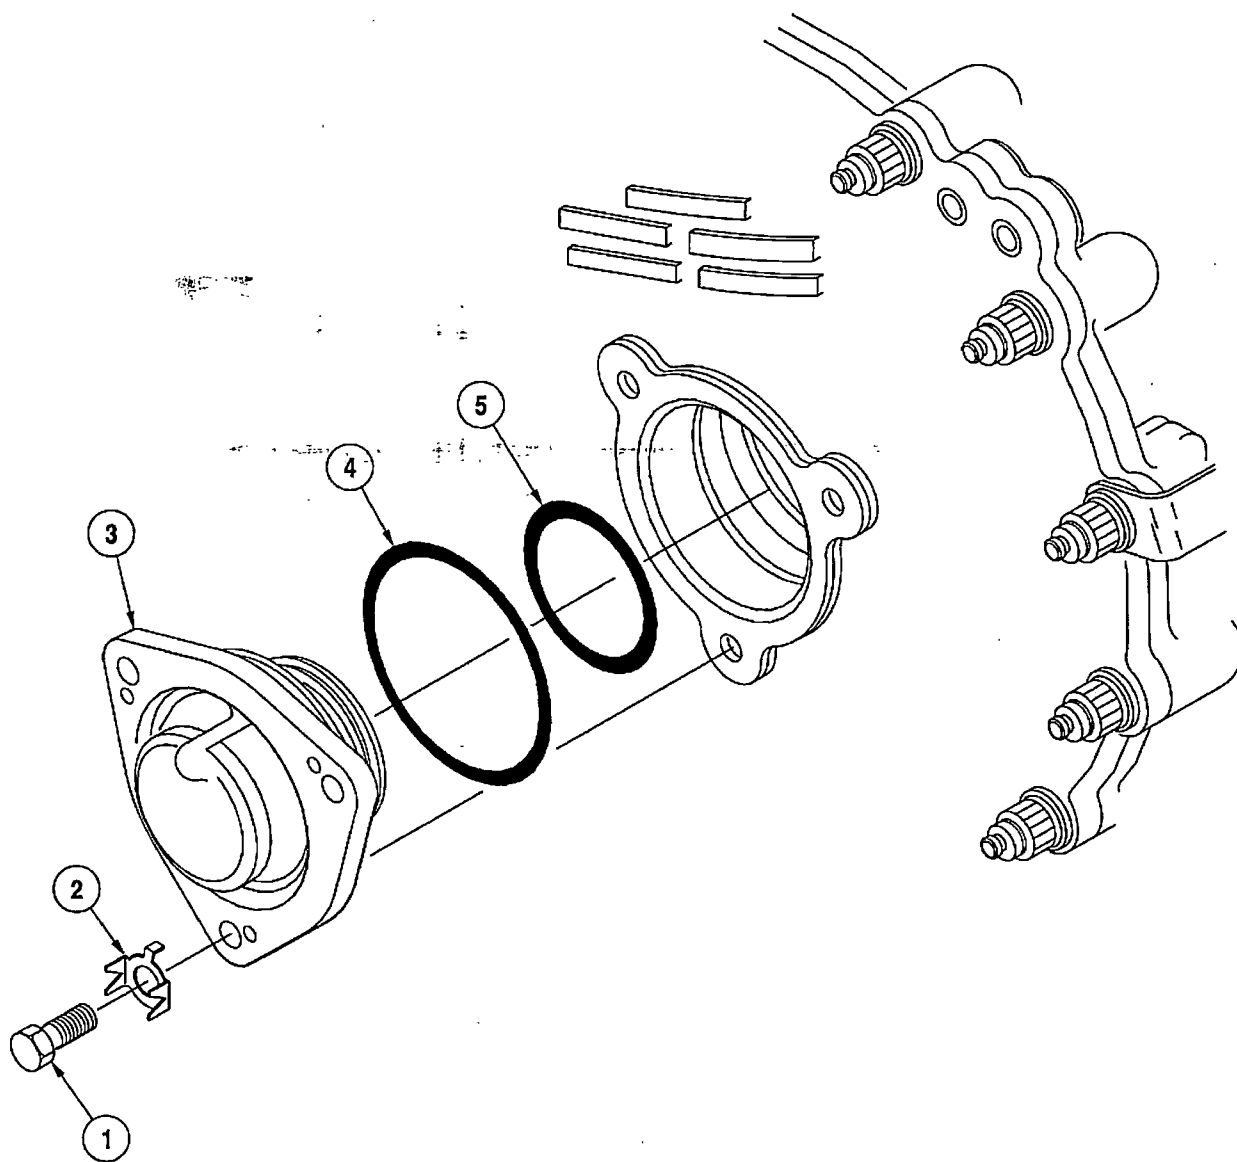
Starter Generator Drive Cover – Removal / Installation
